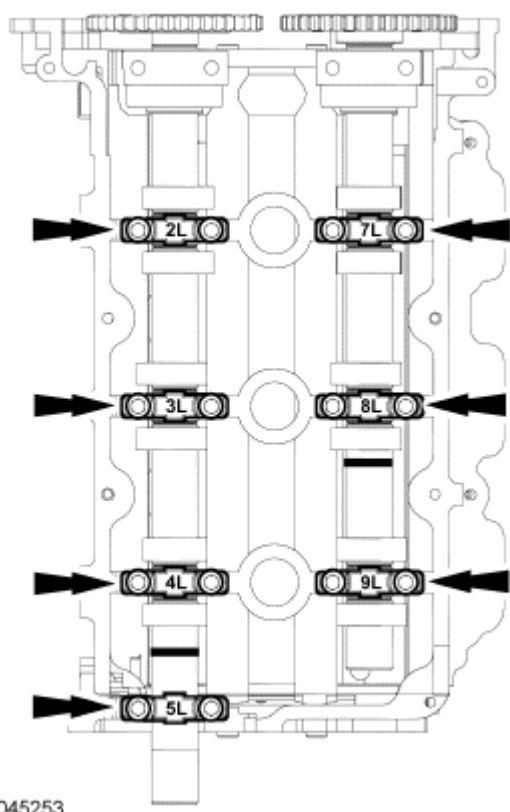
Locating Camshaft Bearing Caps Installing Sequence
